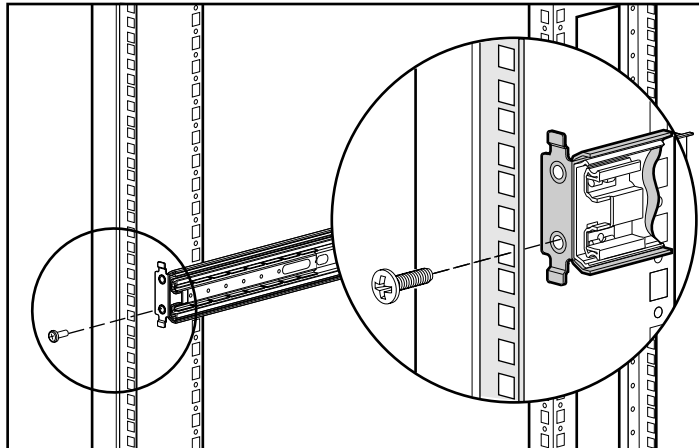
Attaching mounting bracket assembly to the front of the rack
